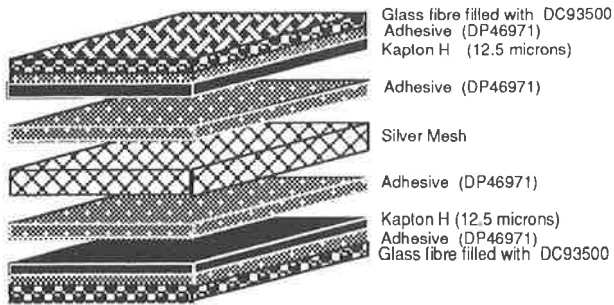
Exploded view of the 0.21 mm-thick, flexible carrier substrate of the solar-panel assemblies (SPA), including 50 micron-thick silver mesh for power transfer
